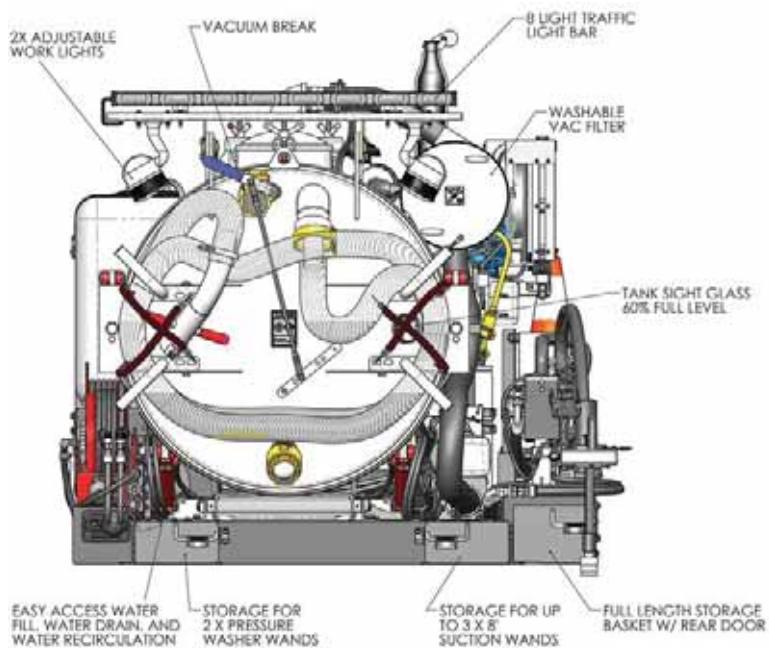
The drawing shows the rear view of the SB VMS (both engine configurations).
